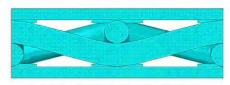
Drawing of a cross section of the sandwich plate structure. The heat exchanger consists of two plates with a wire mesh brazed on the contact points to the plates.
